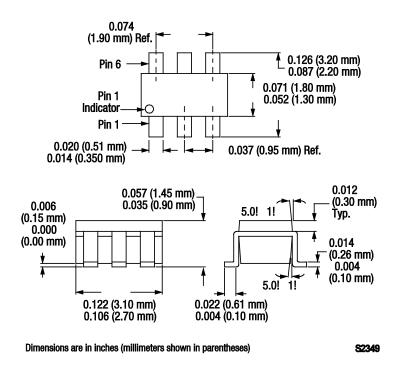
PD18-73/PD18-73LF 6-Pin SOT-6 Package Dimensions
